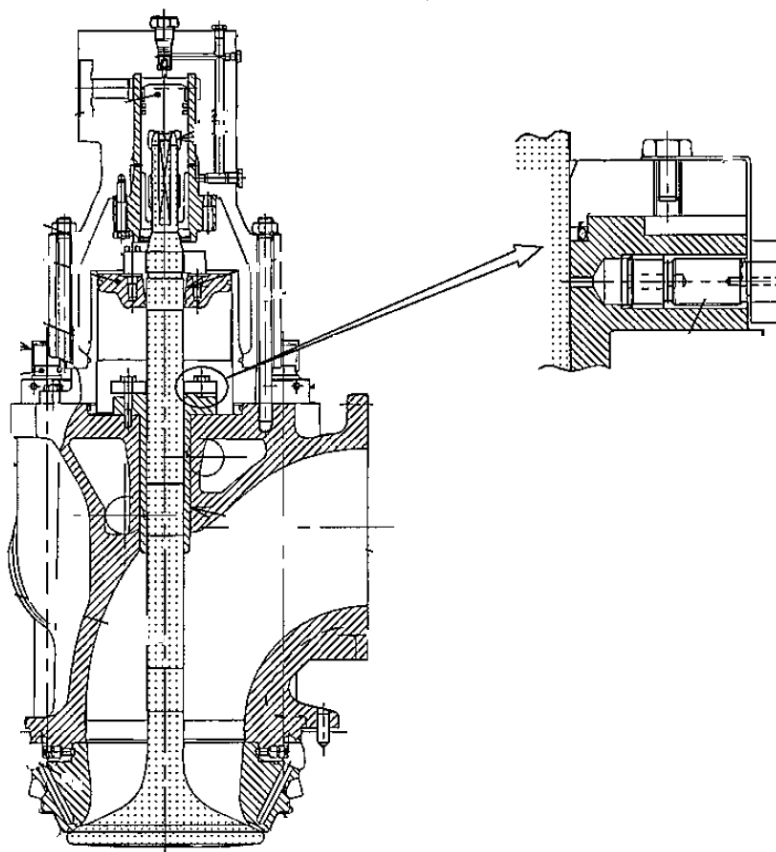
Exhaust valve of the 6DKRN 80/230 engine
